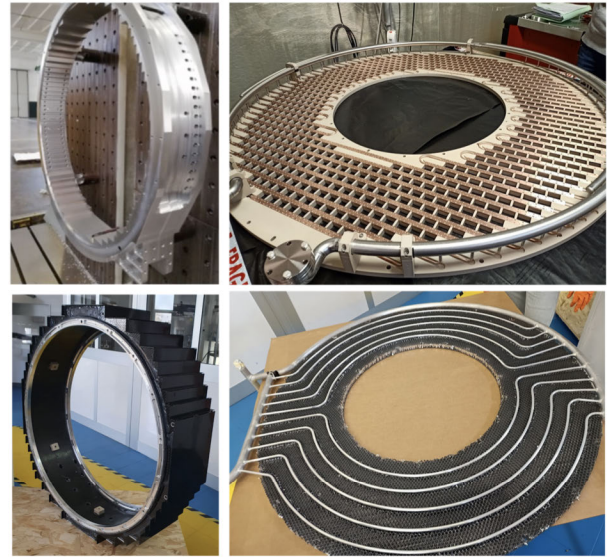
Calorimeter mechanical parts: outer ring (top-left); FEE plate (top-right); inner ring (bottom-left); and front plate with source tubing embedded in the aluminum honeycomb (bottom-right).
